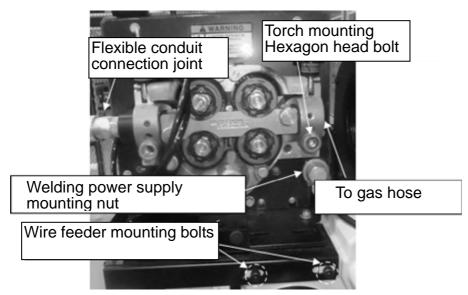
(a) Replacing the wire feeder Auto drive 4R220 (1/3)
